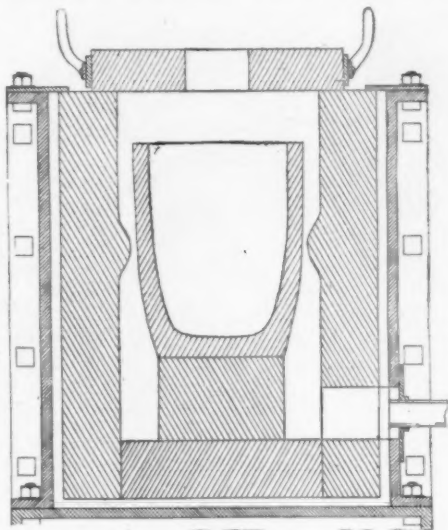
SECTIONAL VIEW OF FURNACE SHOWN IN FIG. 5.
